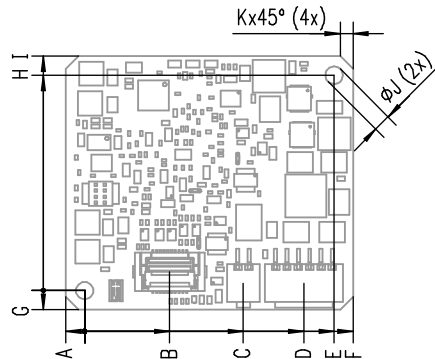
BR_XETK-S3.0 Dimensions - Top View
